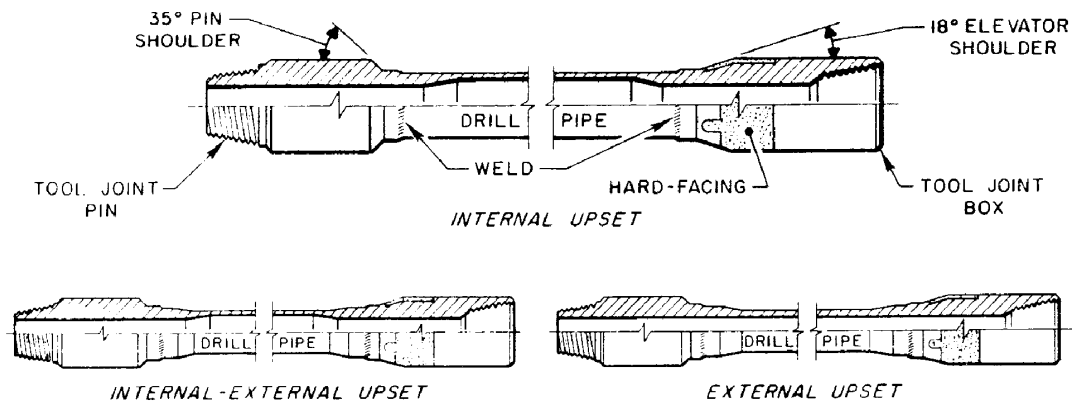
API Drillpipe with Weld-on Tool Joints
